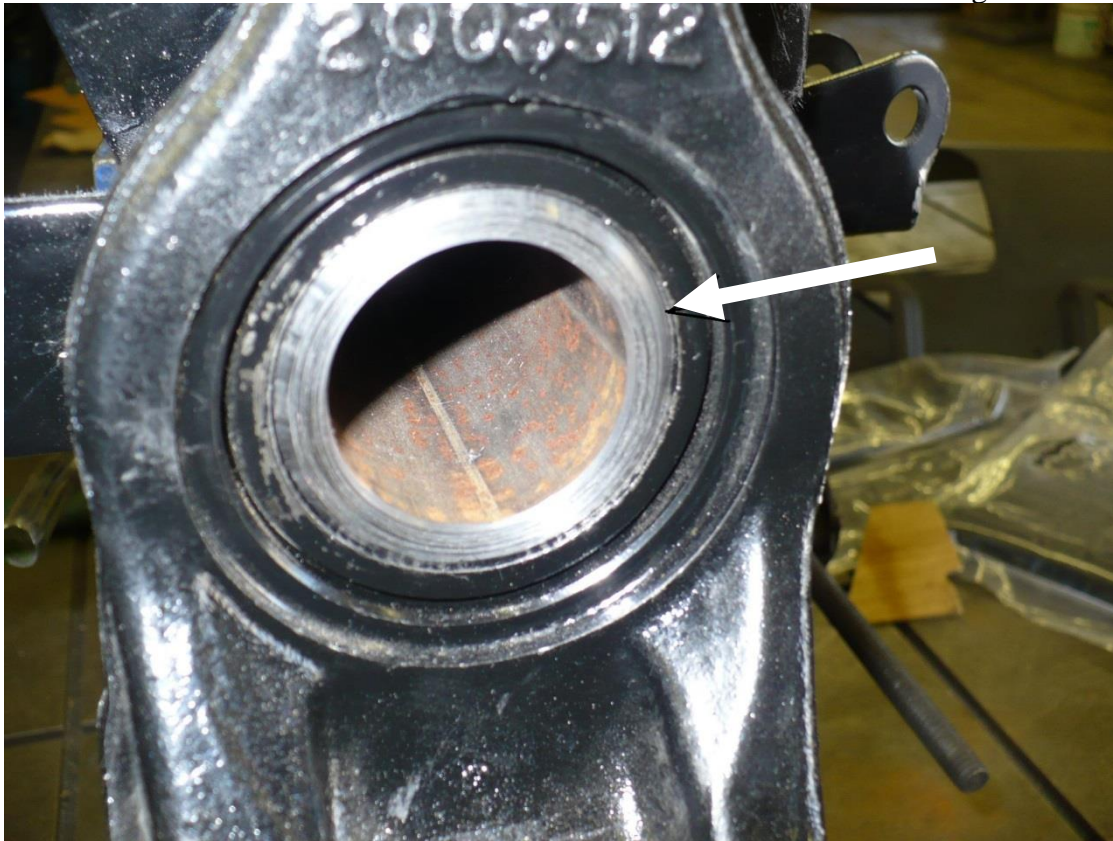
Inner Axle Sleeve Installed Flush With Axle Tube
